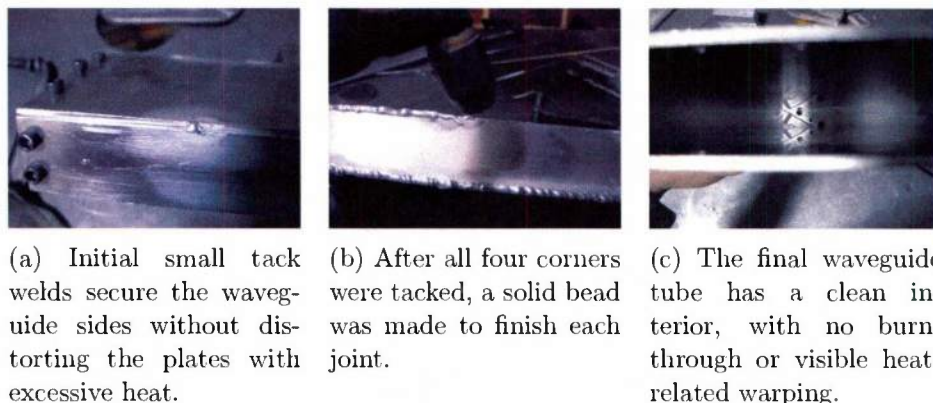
Photographs of the waveguide welding process.
